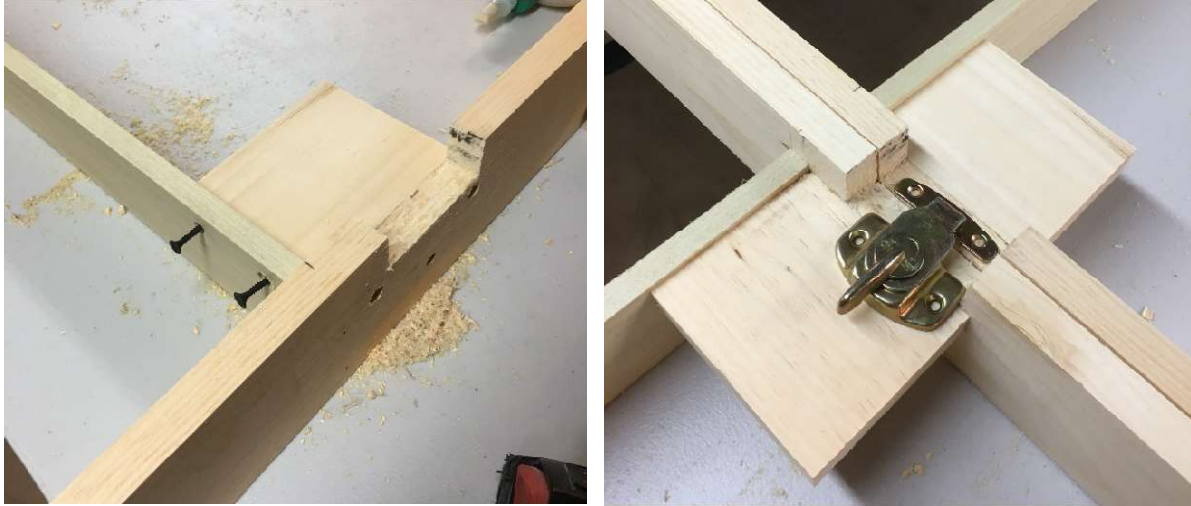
Leaf Lock notch and support: left: notch and support block installation, right: installed leaf lock
